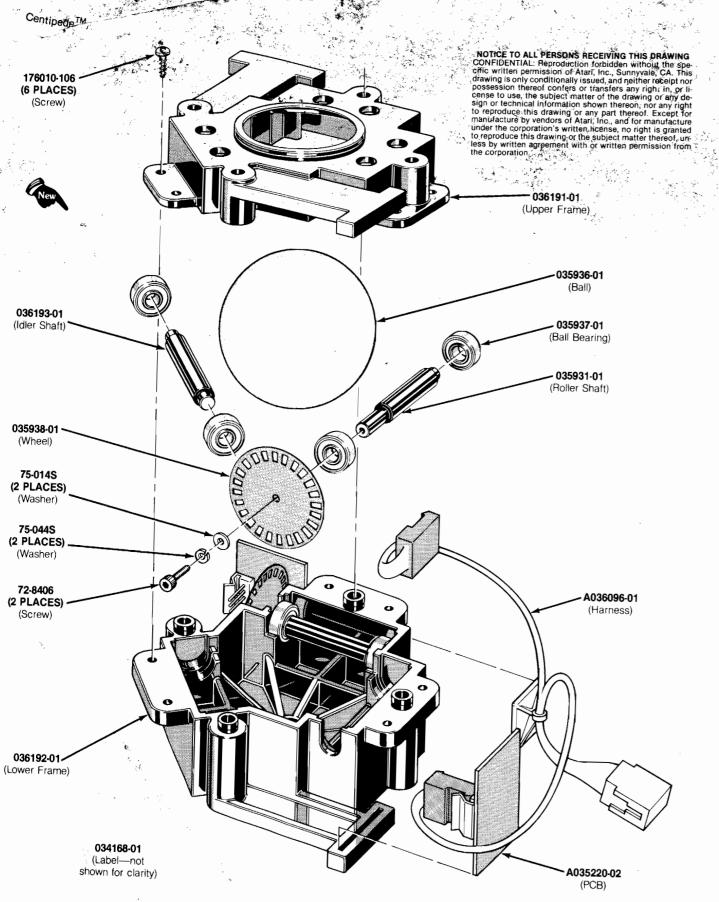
Mini-Trak Ball™ Assembly A036190-01 A
